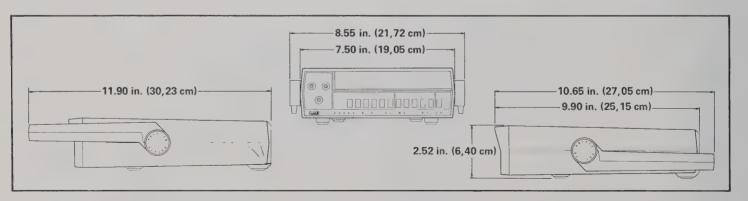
MODEL 8000A OUTLINE DRAWING
